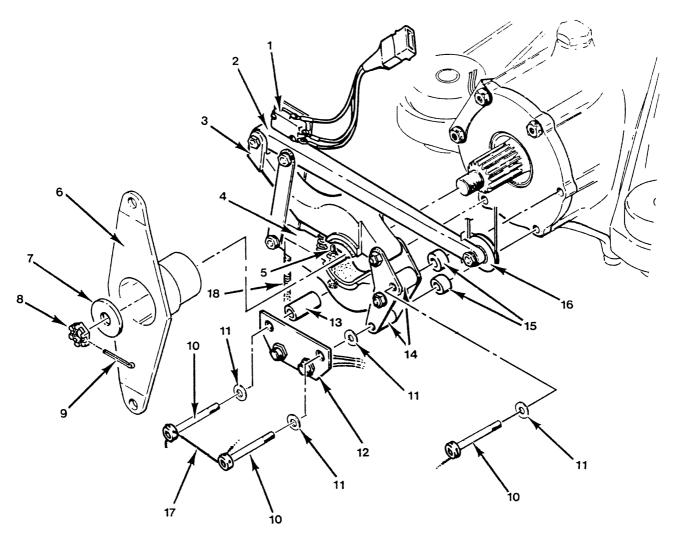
ROTOR BRAKE INSTALLATION
